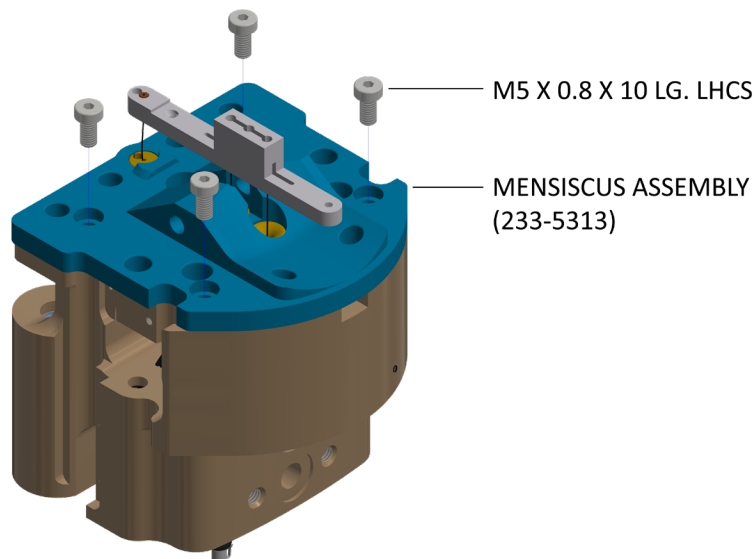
Remove the Fasteners from the Meniscus Assembly
